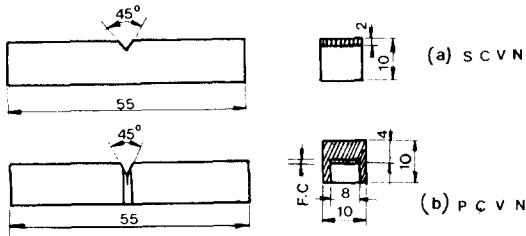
Dimension of standard and precracked V-notch specimens (mm)
